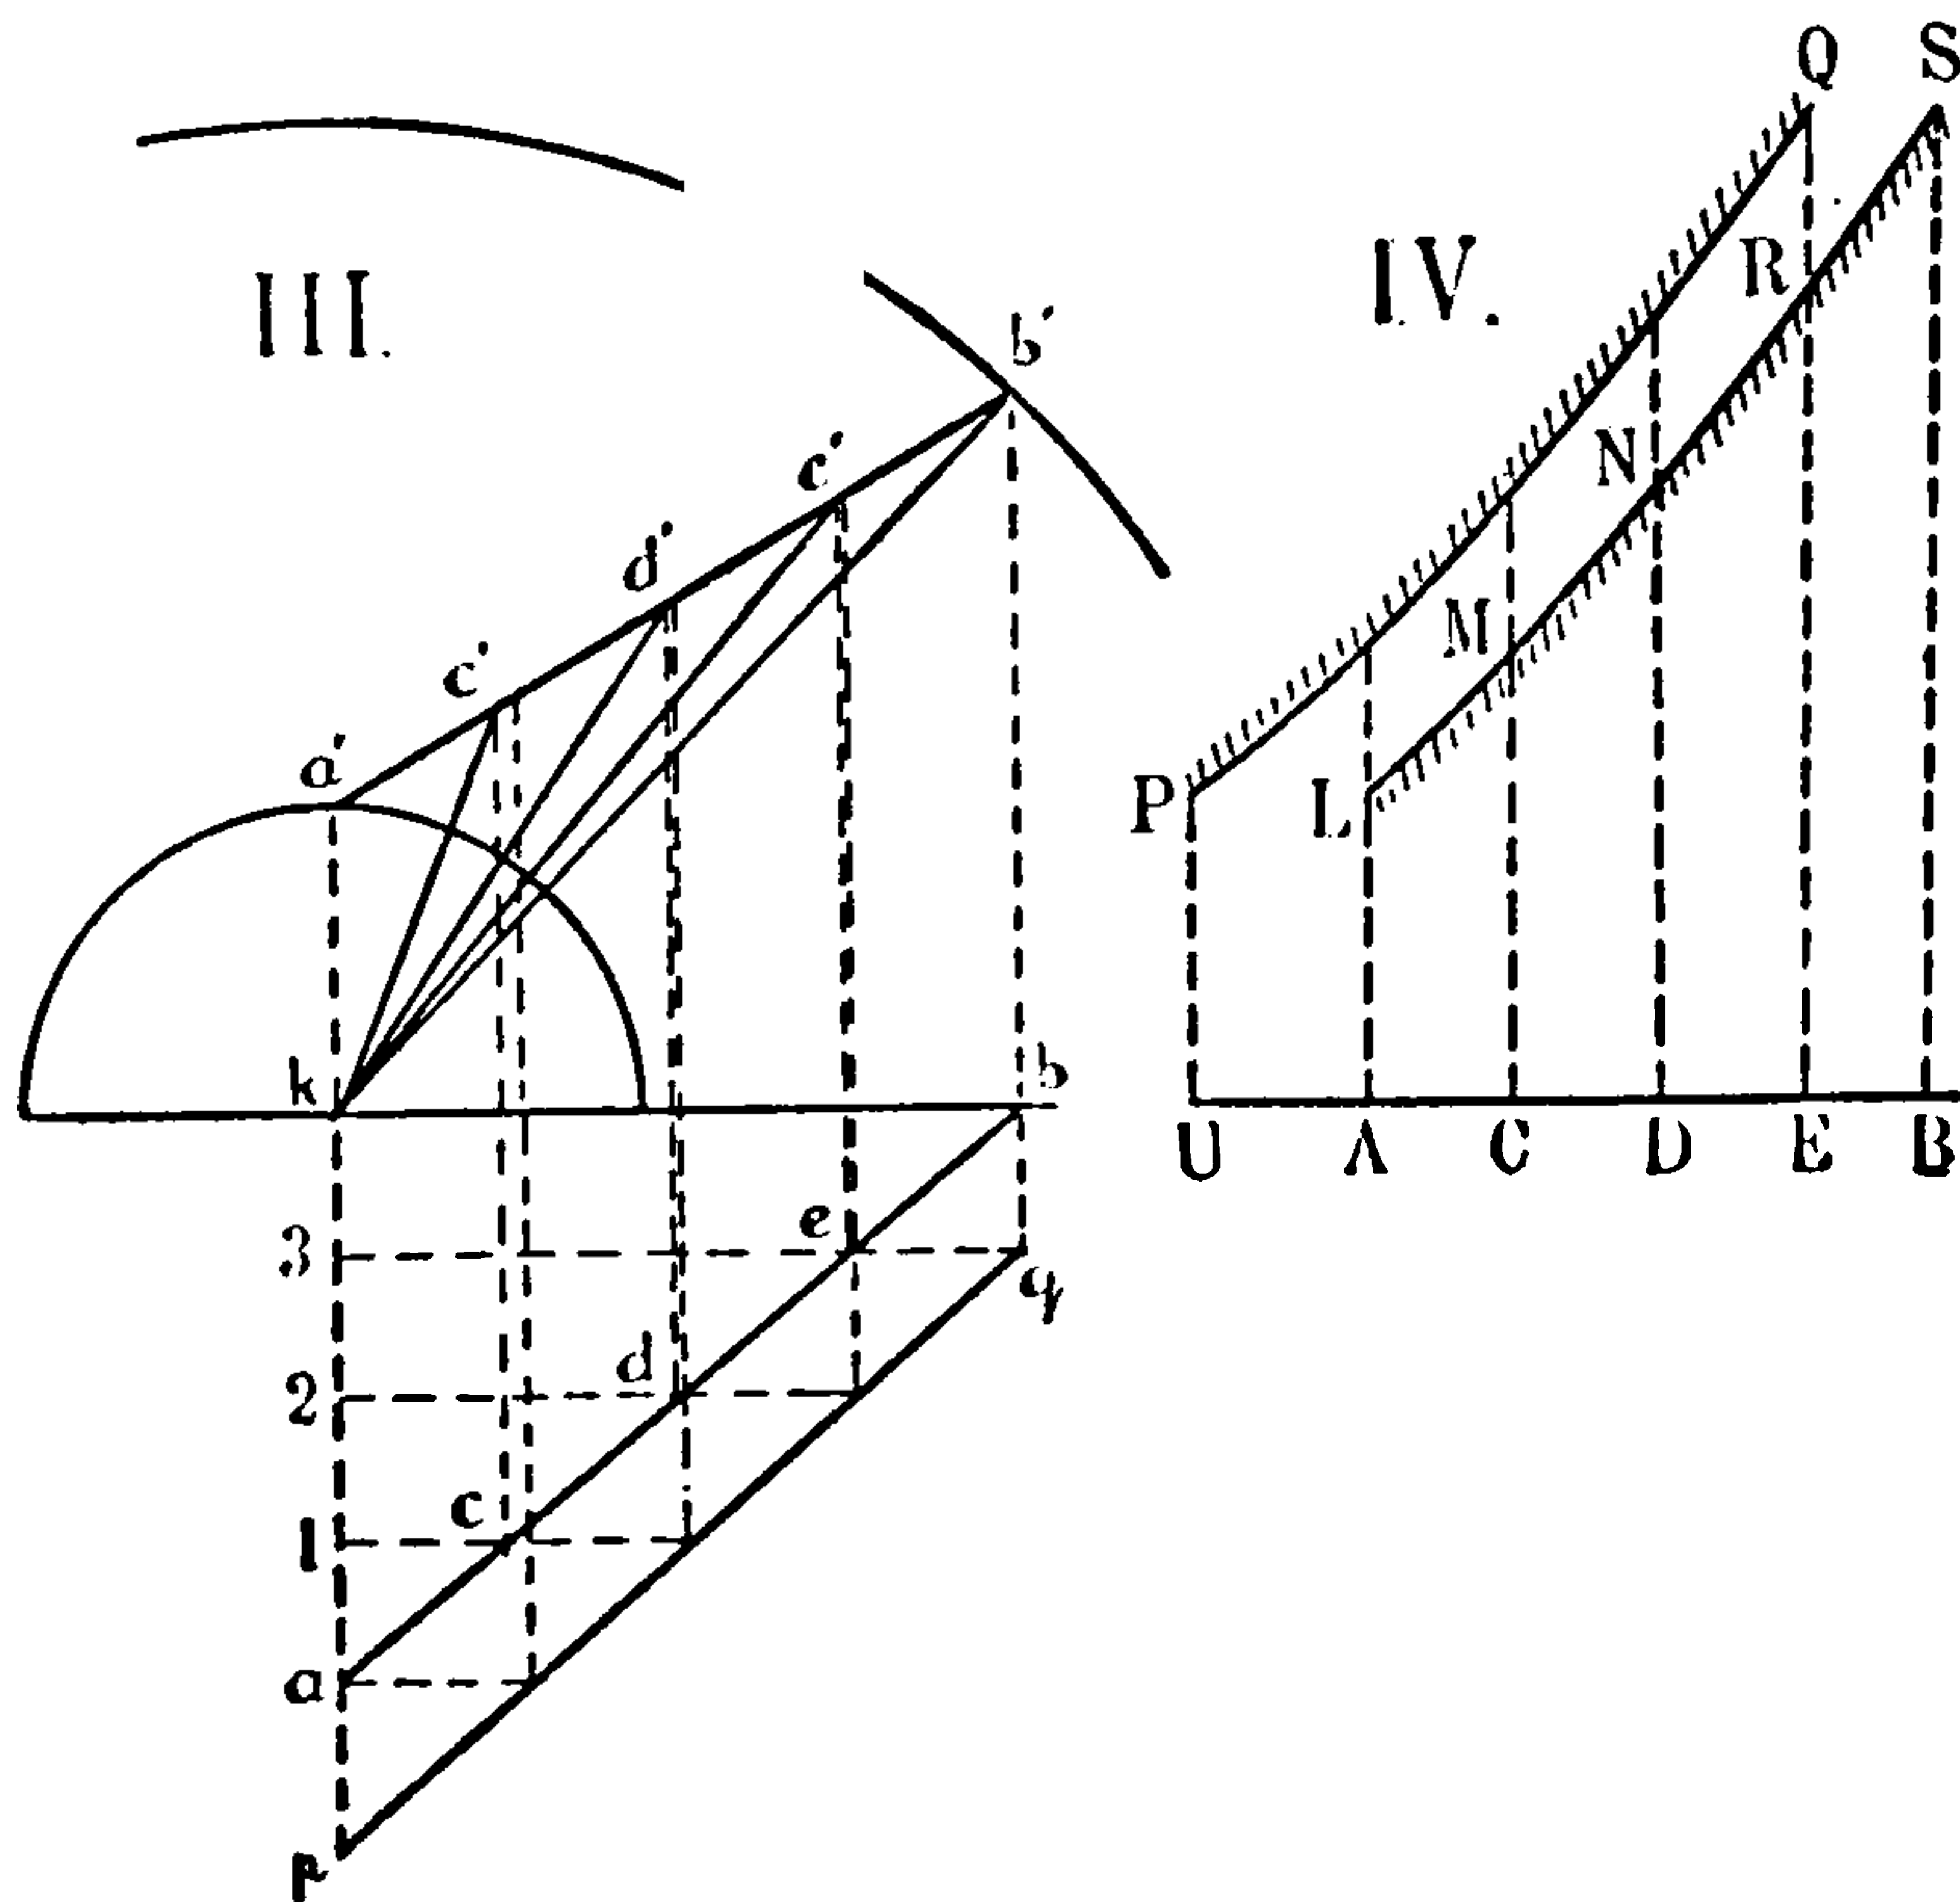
METHOD OF DRAWING THE HYPERBOIDAL FACE OF THE ROTOR OF A COMPRESSOR WITH STRAIGHT BLADES.
